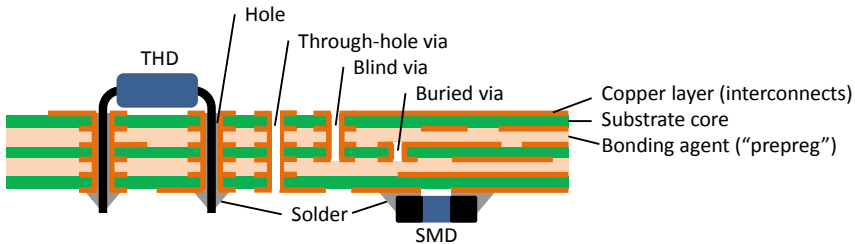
Cross-section of a multilayer board with six routing layers
